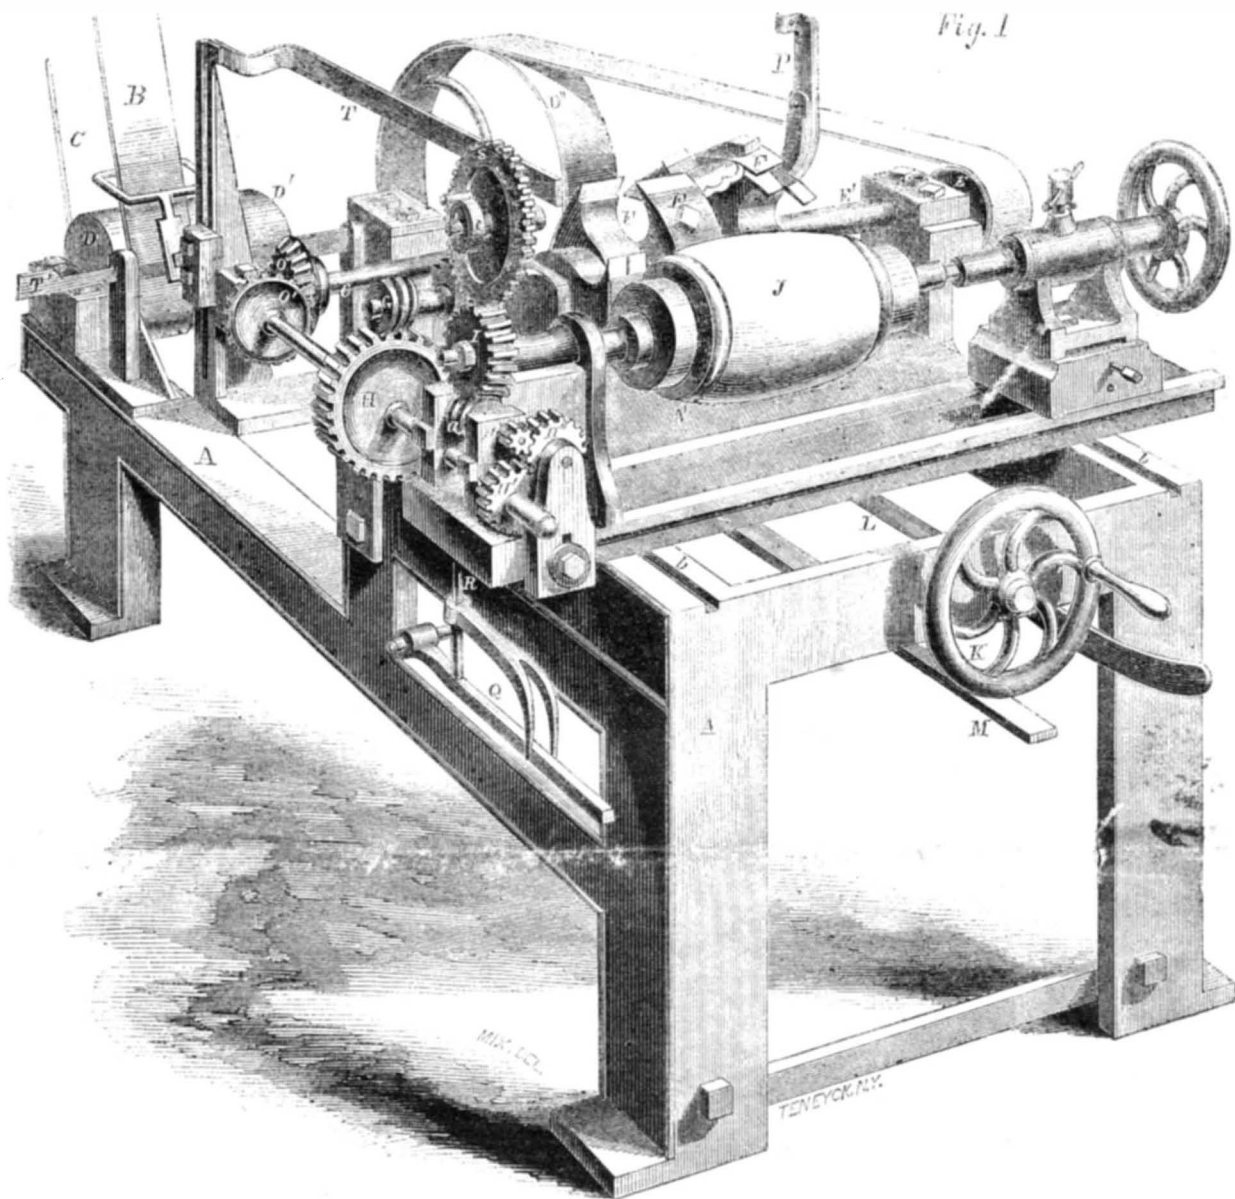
is a perspective view of the machine, with cutters arranged for cutting hubs. The whole is placed on a frame, A. B is a belt or prime-mover passing through a belt-shipper, C, and giving motion to a fast or loose pulley, D D', the shaft of which carries a wheel, D''. This wheel by a belt moves a pulley, E, on whose shaft, E', the cutters, F, are placed. Outside the bearing of shaft, E', and on it, the spiral, G, is fixed, so that by the rotation of the cutters it gives motion to the gear wheel, H, that in its turn moves the gearing, H' H'' H'''. On the shaft of H'' is another spiral, α, that moves the wheel, I, and so rotates the stick, J, which is to be
